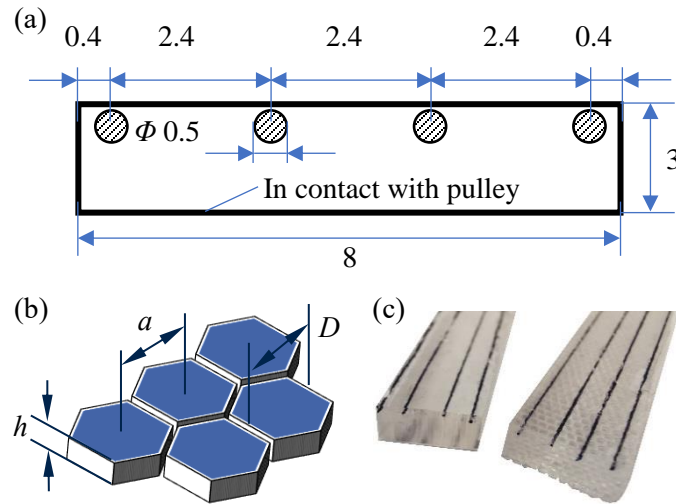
Design of the belt with tensile cords with the (a) cross-section drawing (unit: mm) and (b) schematic of the patterns for patterned belts with tension cords, and (c) picture of the as-molded belts.
